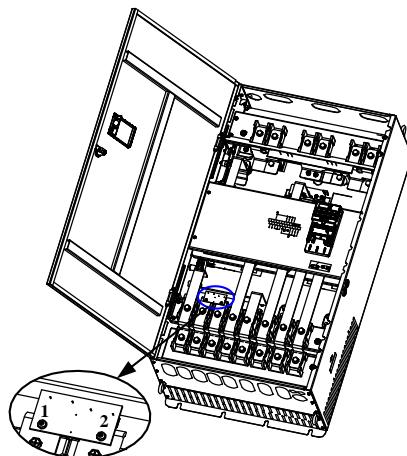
Fit and remove the internal EMC filter (Size K)
